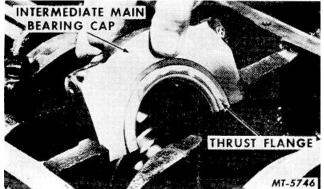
Main Bearing Cap with Thrust Flanges (No. 3)
